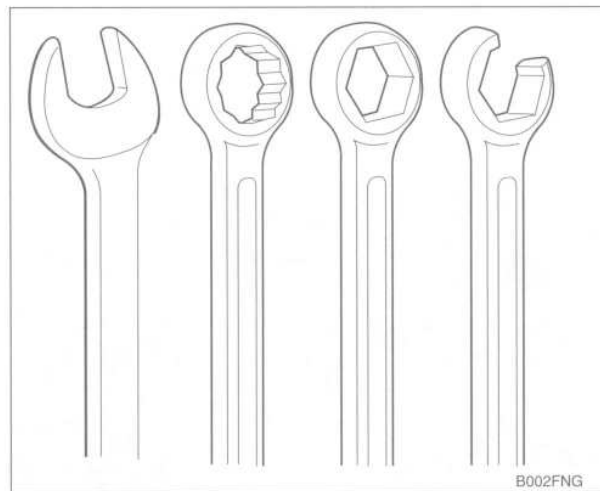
Types of wrench heads. From left, open-end, 12-point box-end, 6-point box-end, flare nut.
